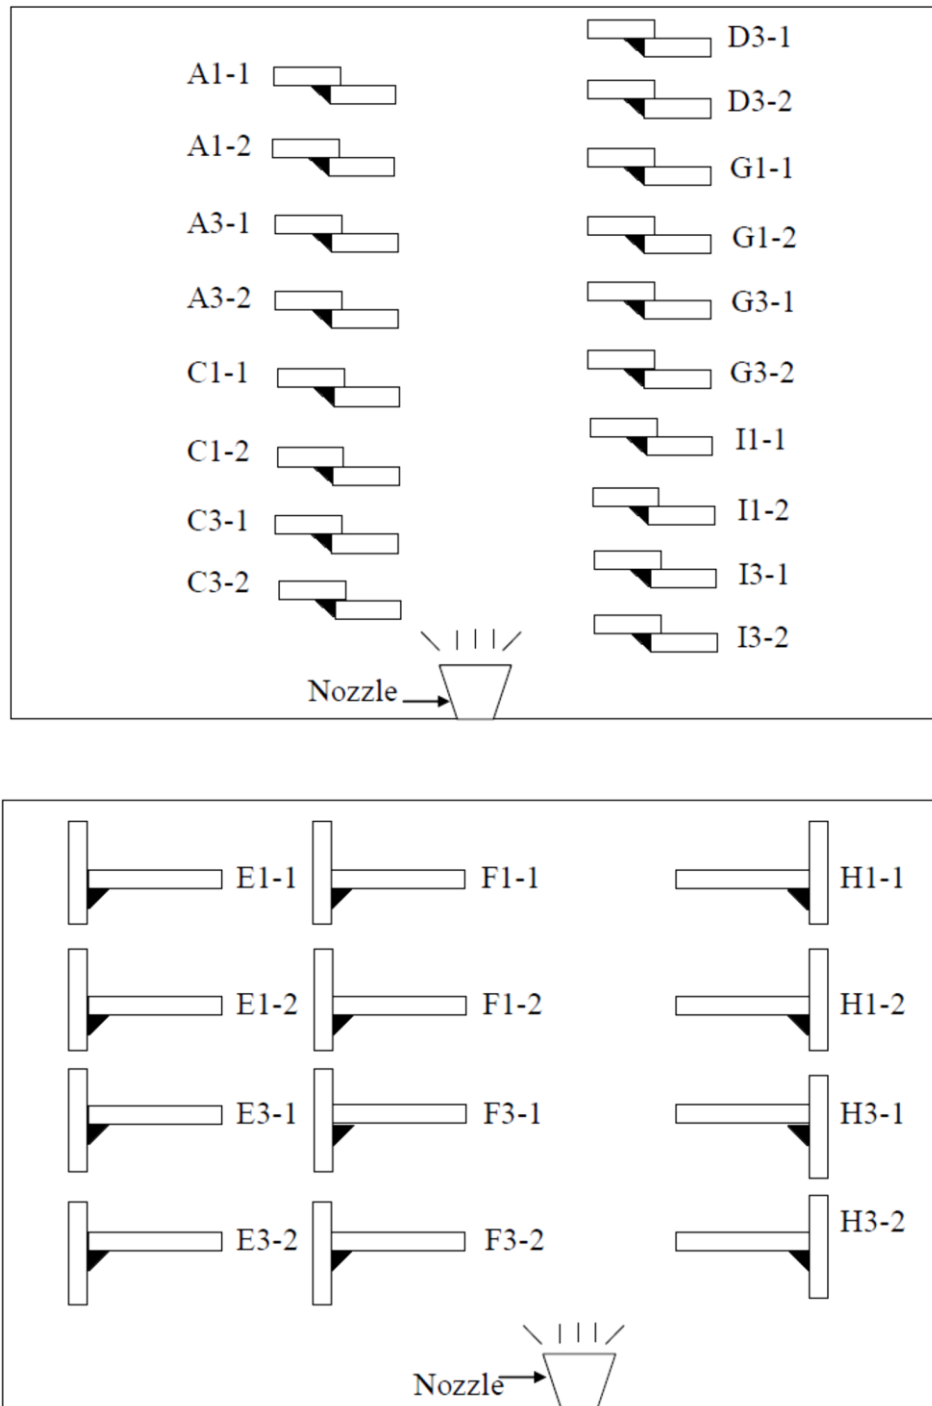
ASTM G85 welded AA7xxx (a) lap-joint and (b) T-joint corrosion chamber rack lay-outs. Internal corrosion chamber dimension necessitated separate exposure of lap-joint and t-joint weld configurations.
